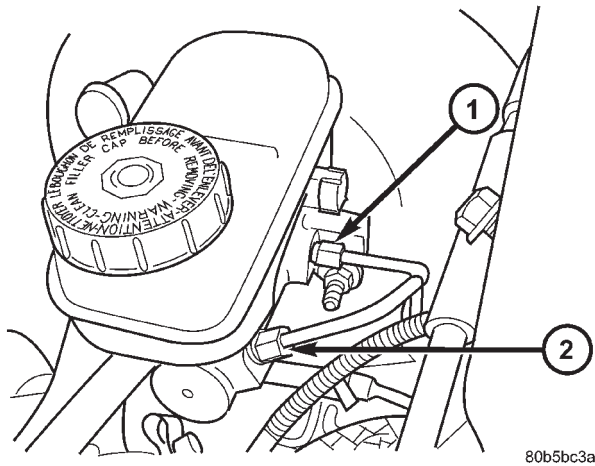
PRIMARY AND SECONDARY BRAKE TUBES
